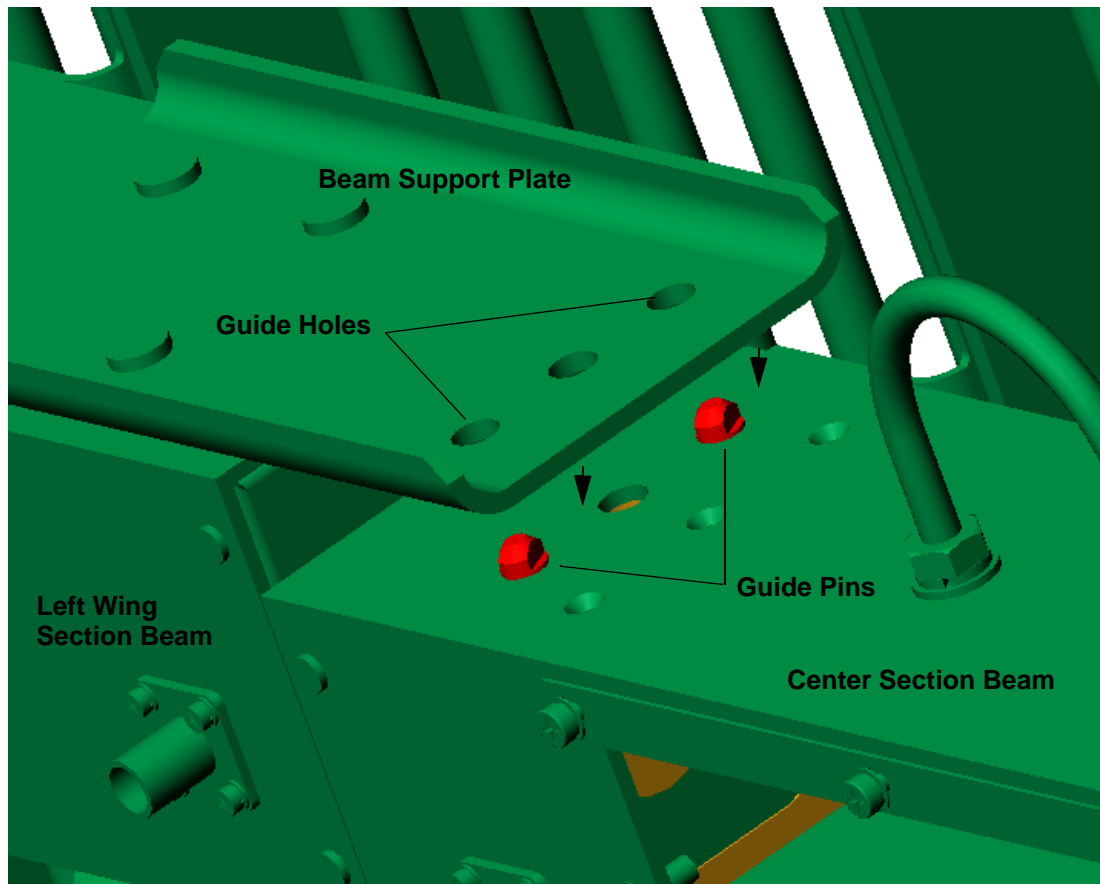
illustrates the placement of the left wing section when you attach it to the center section.
